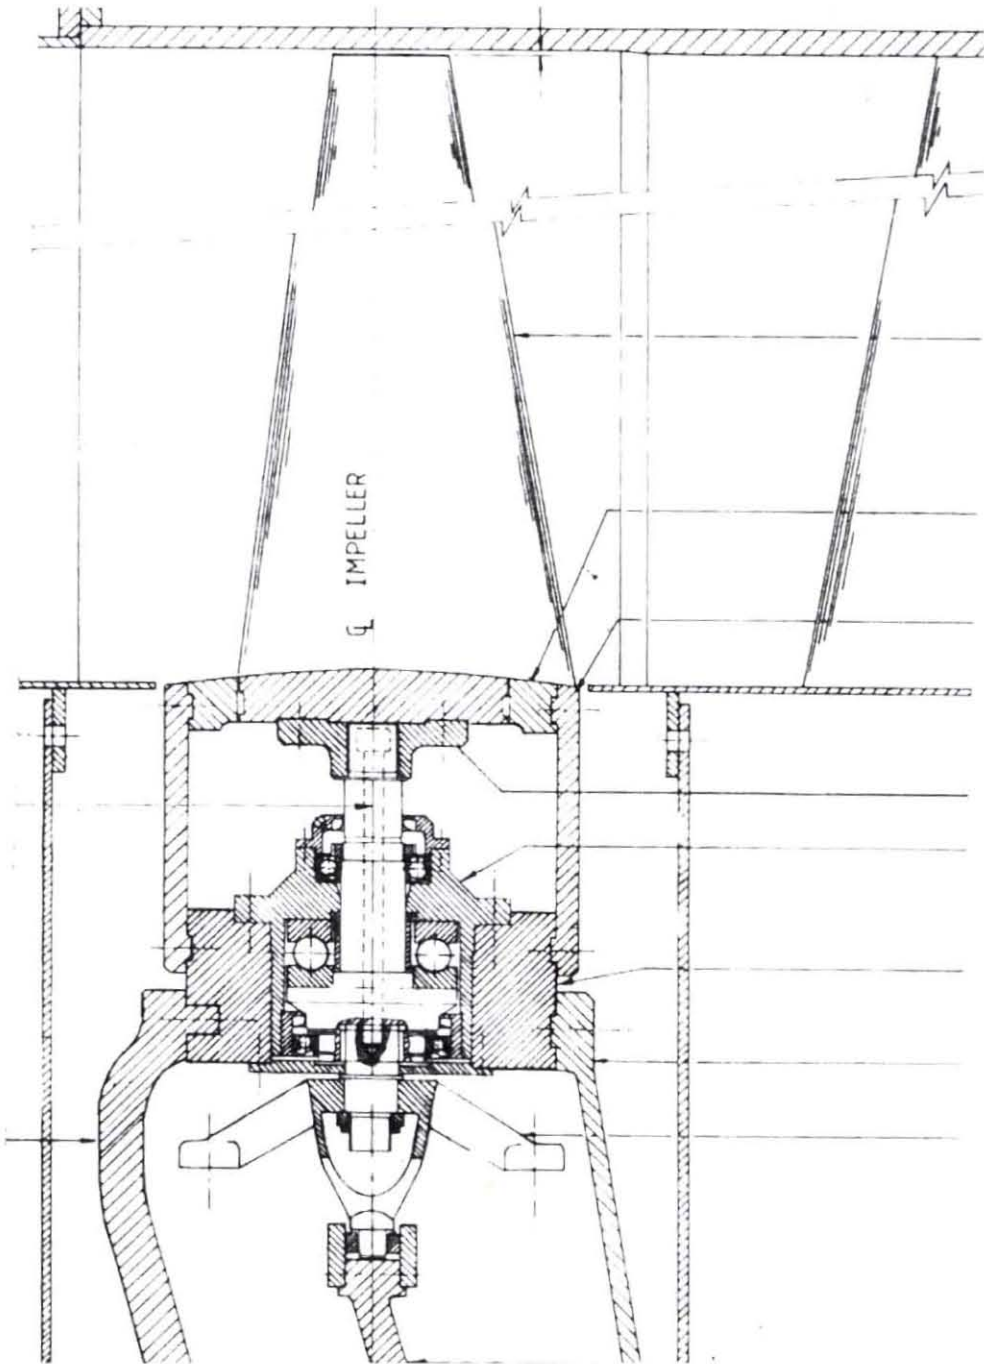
Section drawing of one of the fan blades of the FD fan at Majuba
